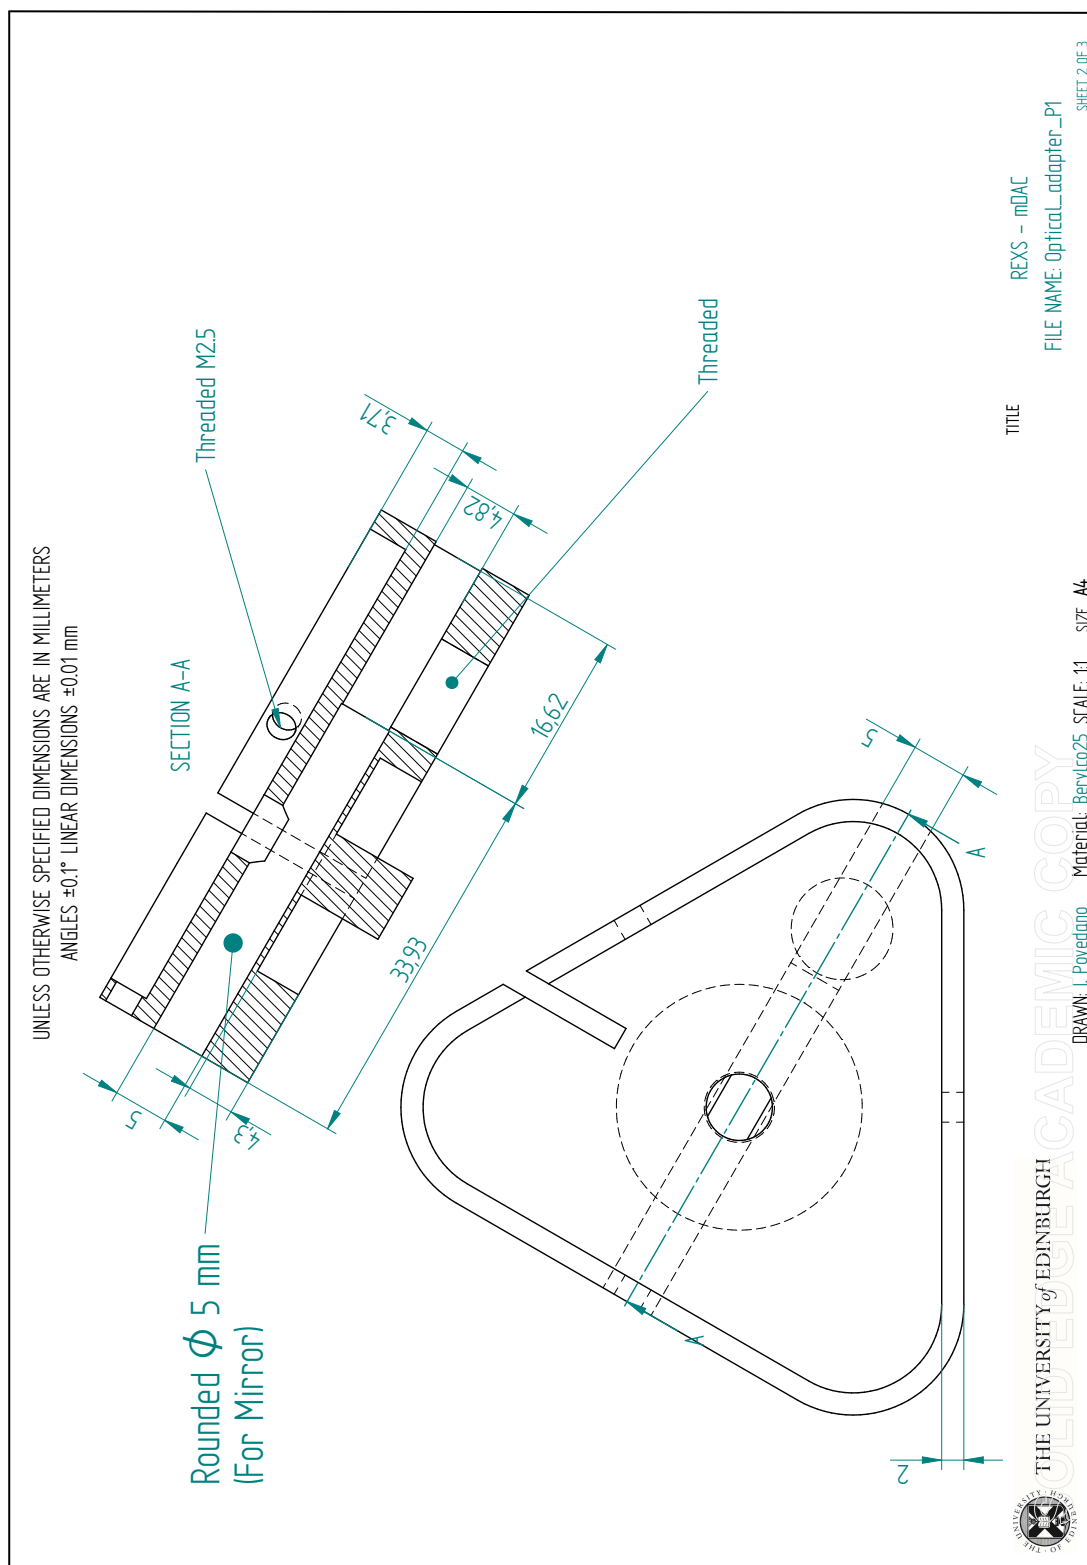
Optical holder prototype 1. Sheet 2 of 3.
